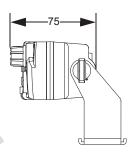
Side View of O5 Control Head with Remote Mount and Trunnion
